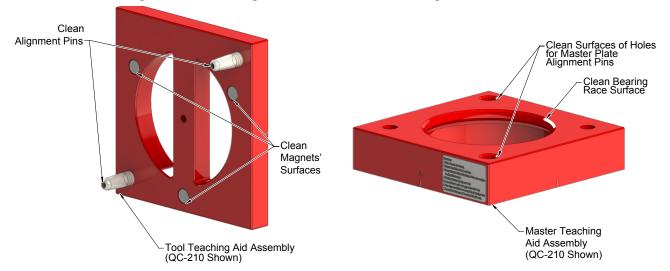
Cleaning of Master and Tool Teaching Aid Assemblies
